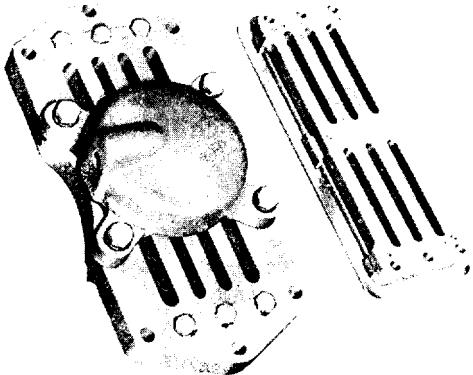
RN-1—Type "A" NL Rectangular Channel Valve Inlet With Free Air Unloader Assembled at Left, Discharge at Right.
